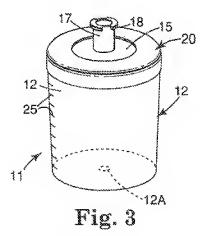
shows paint pot 11 attached to a spray gun 1. Fig. 3 shows the paint pot in an assembled configuration but removed from the spray gun. Fig. 2 is an exploded view of the paint pot in Fig. 3.
